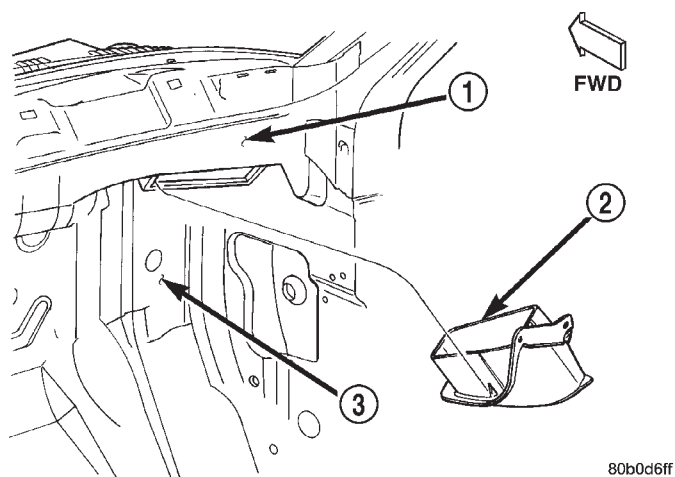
Heater-A/C Housing Plenum Adapter Remove/Install
